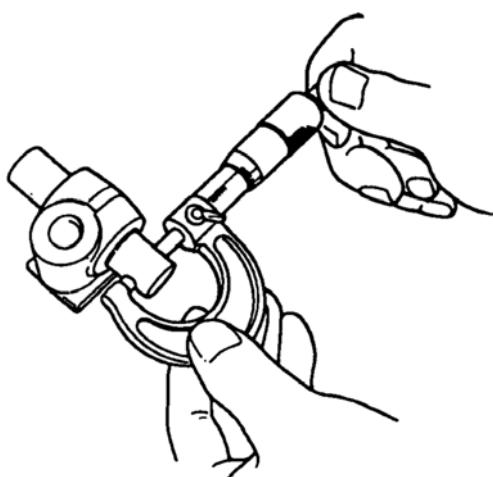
Remove, Inspect, and Install Rocker Arm Assembly.
